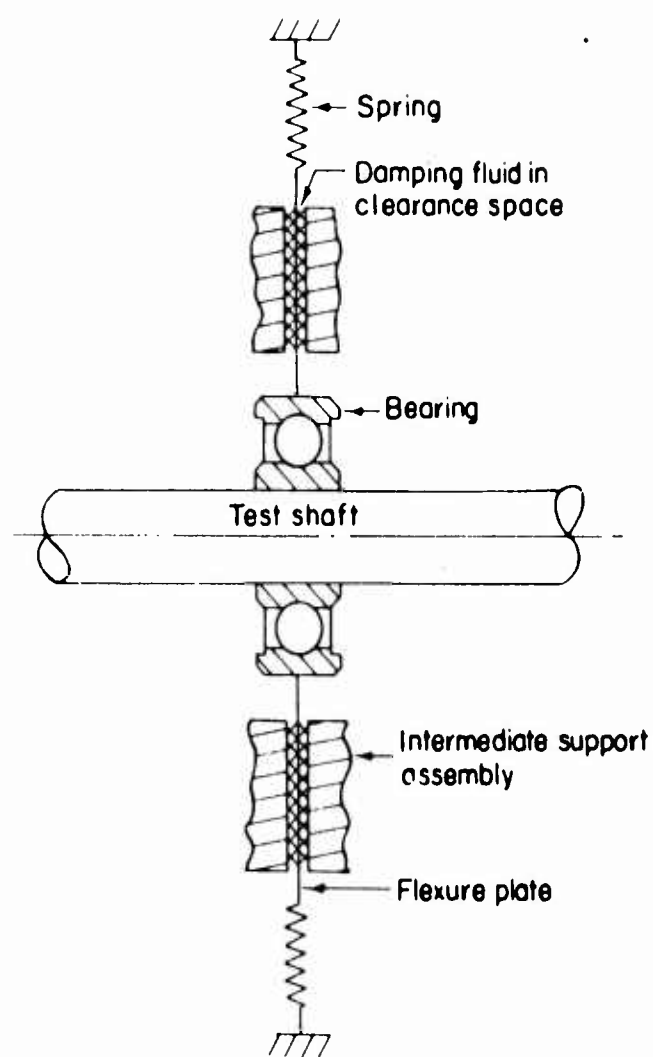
is a schematic diagram of the intermediate support bearing and damper assembly. The intermediate support consists of two heavy square plates, one of which is bolted to a lathe steady-rest. The plates are bolted together parallel to each other with ground spacers between them to provide the necessary oil film thickness for support damping. An 0.018-inch-thick flexure plate, which mounts the support bearing, is sandwiched between the heavy outer plates. By filling the gap between the outer plates and flexure plate with a damping fluid such as oil and clamping the test shaft in the support bearing bore, viscous damping forces are generated when the vibrating shaft causes the damper assembly to move laterally. The damping factor may be changed by inserting spacers of different thickness between the outer plates or by using damping fluid of different viscosity.
